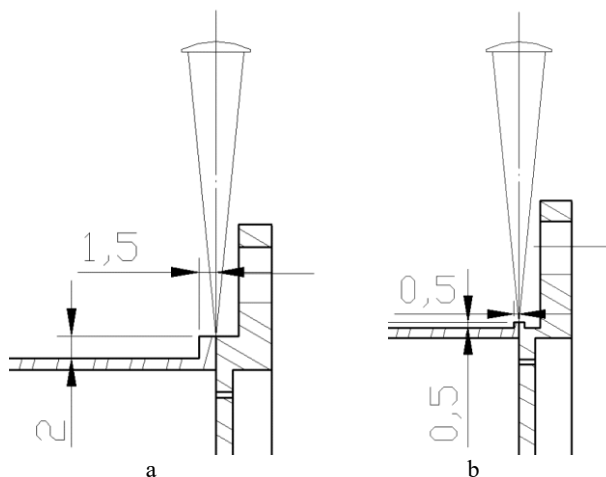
Schemes of welded edges a - “cover with flange” and b - “cover and flange with flanges” of the sensor housing.
